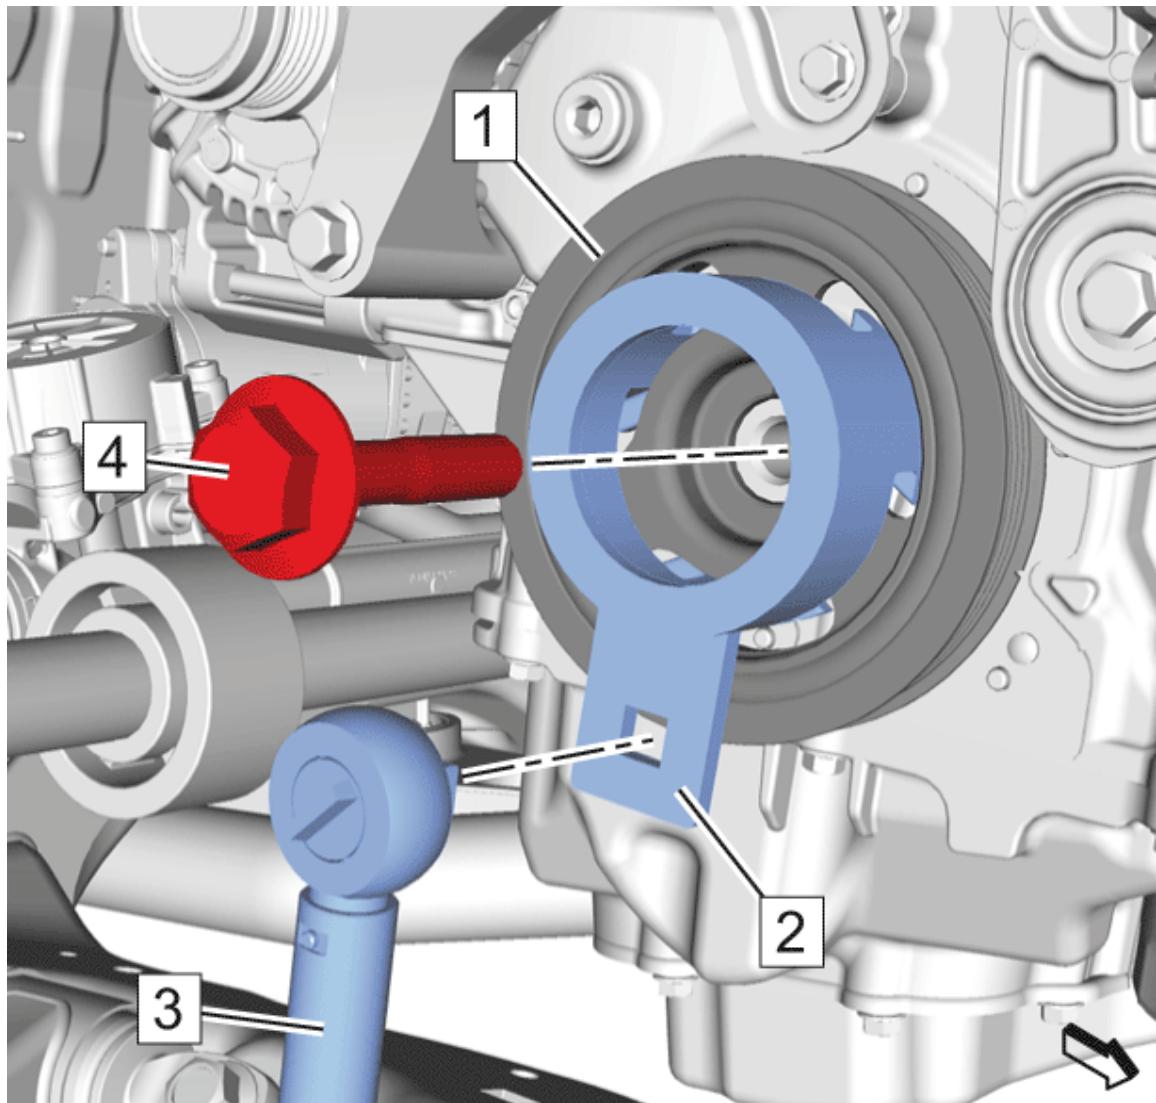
Crankshaft Balancer, Special Tools And Bolt
